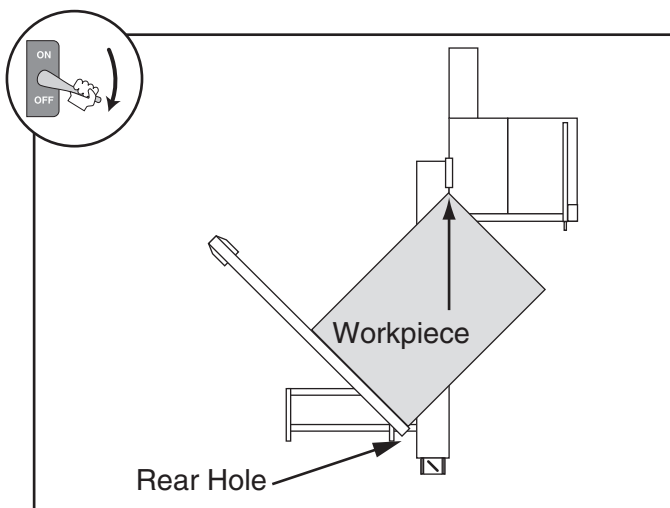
Crosscut fence mounted in rear hole for miter cuts from 0° to 45°.
